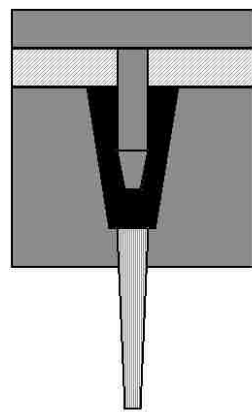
Schematic diagram of squeeze casting machine [29]
